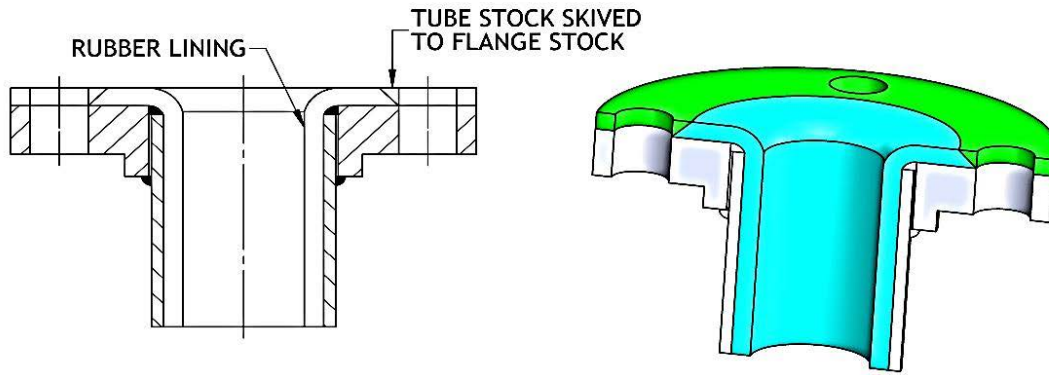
Rubber lining to maintain thickness over the flange face (Tube stock skived to flange stock)
